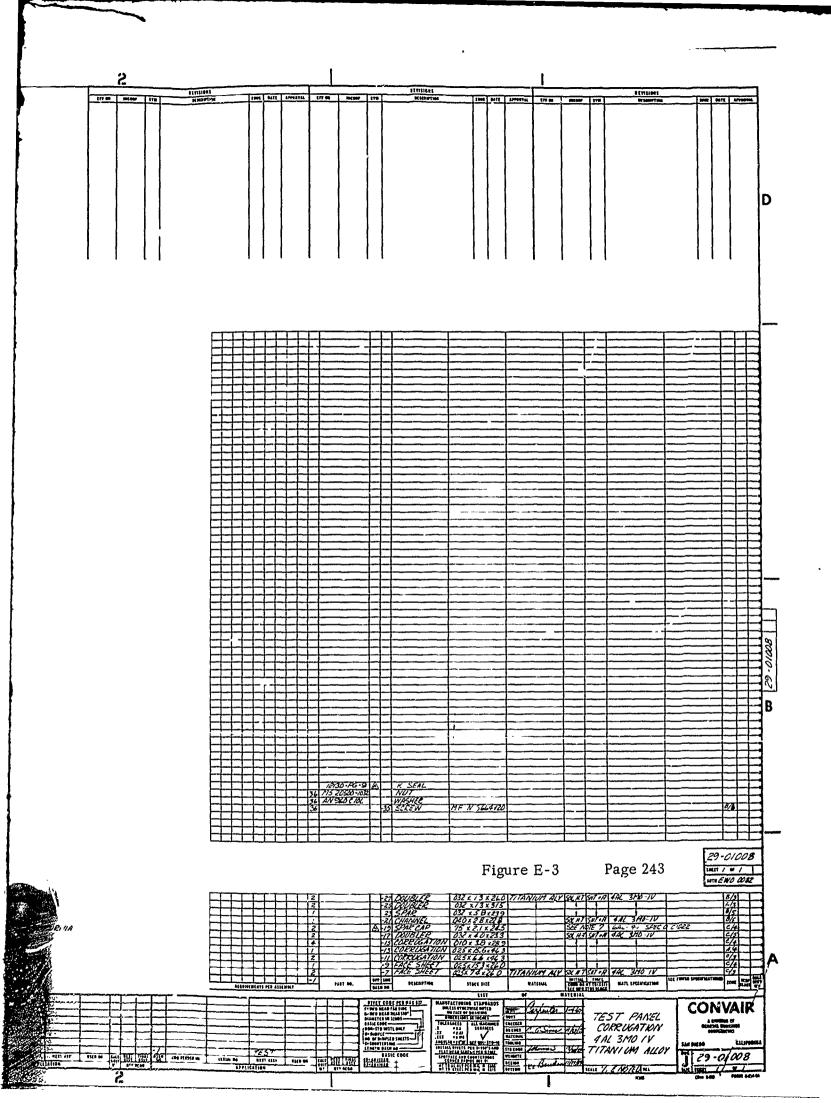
COMPRESSION TEST PANEL; Corrugation - Engineering Drawing 29-01008
